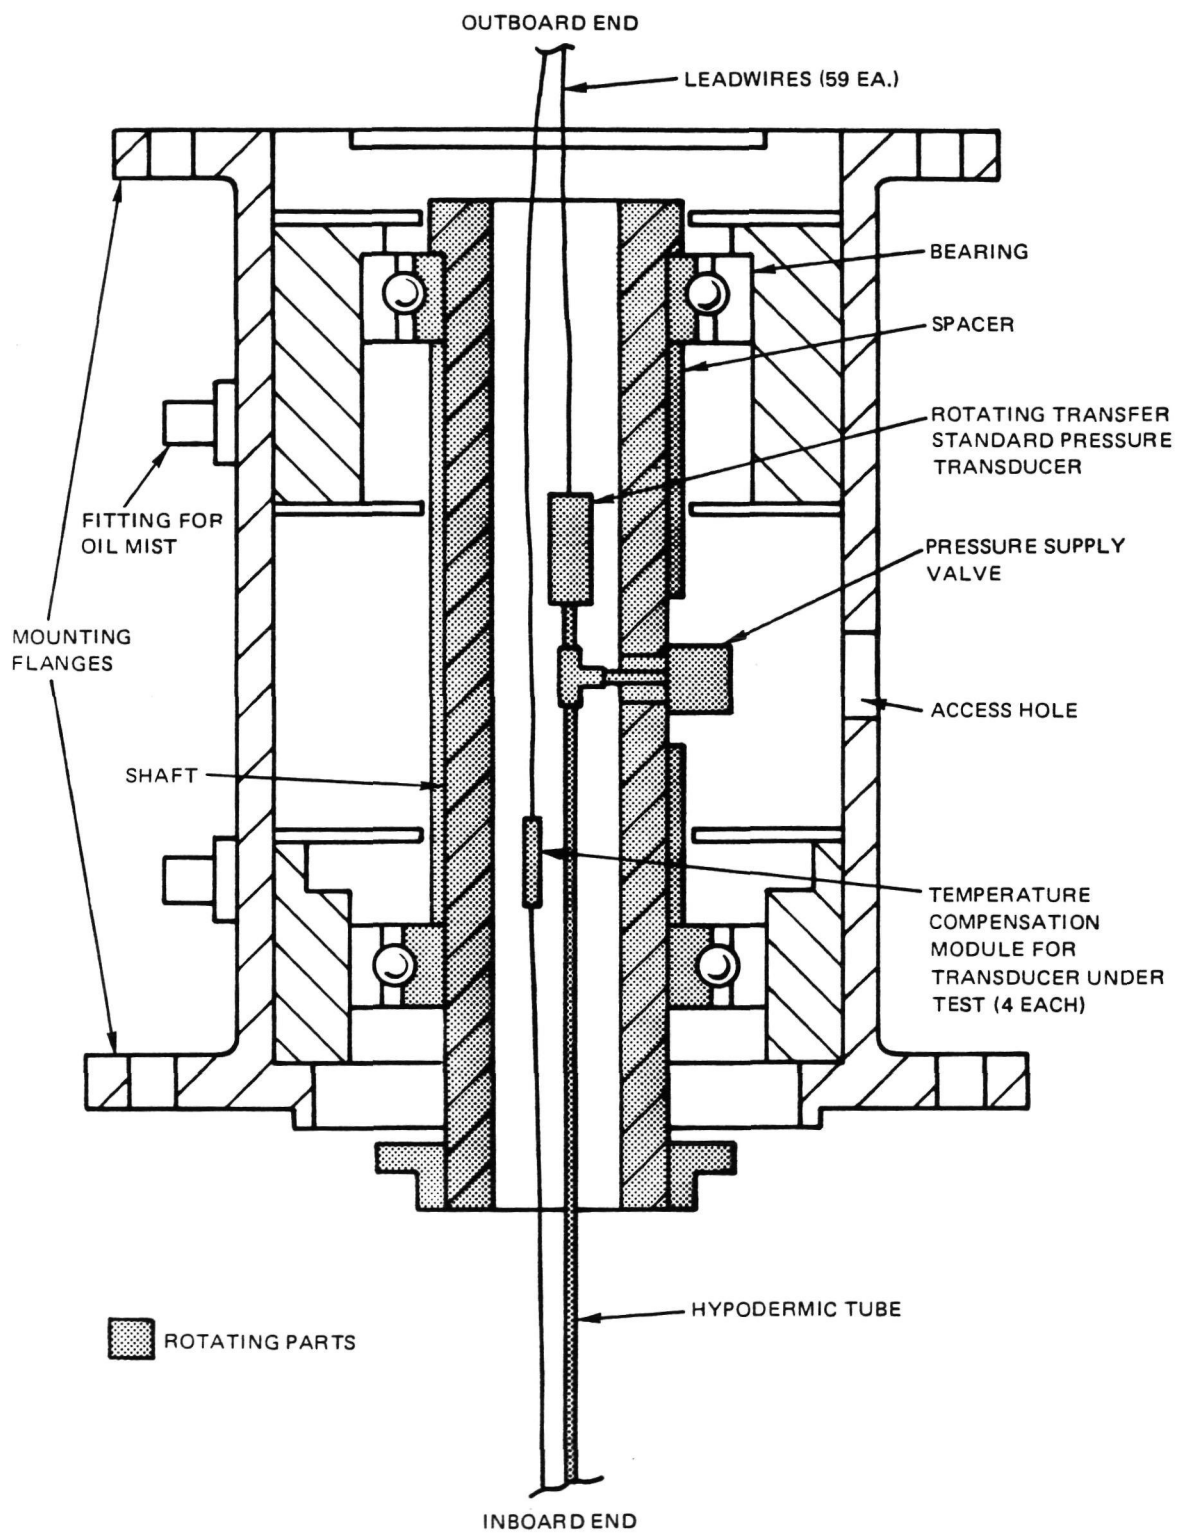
Coupling and Pressure Charging Device (Conceptual Drawing)
